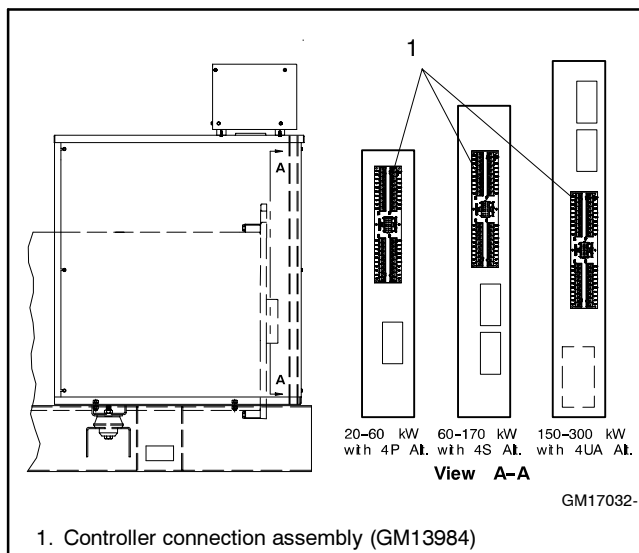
Controller Connection Assembly Mounting Locations in Junction Box (20-300 kW)
